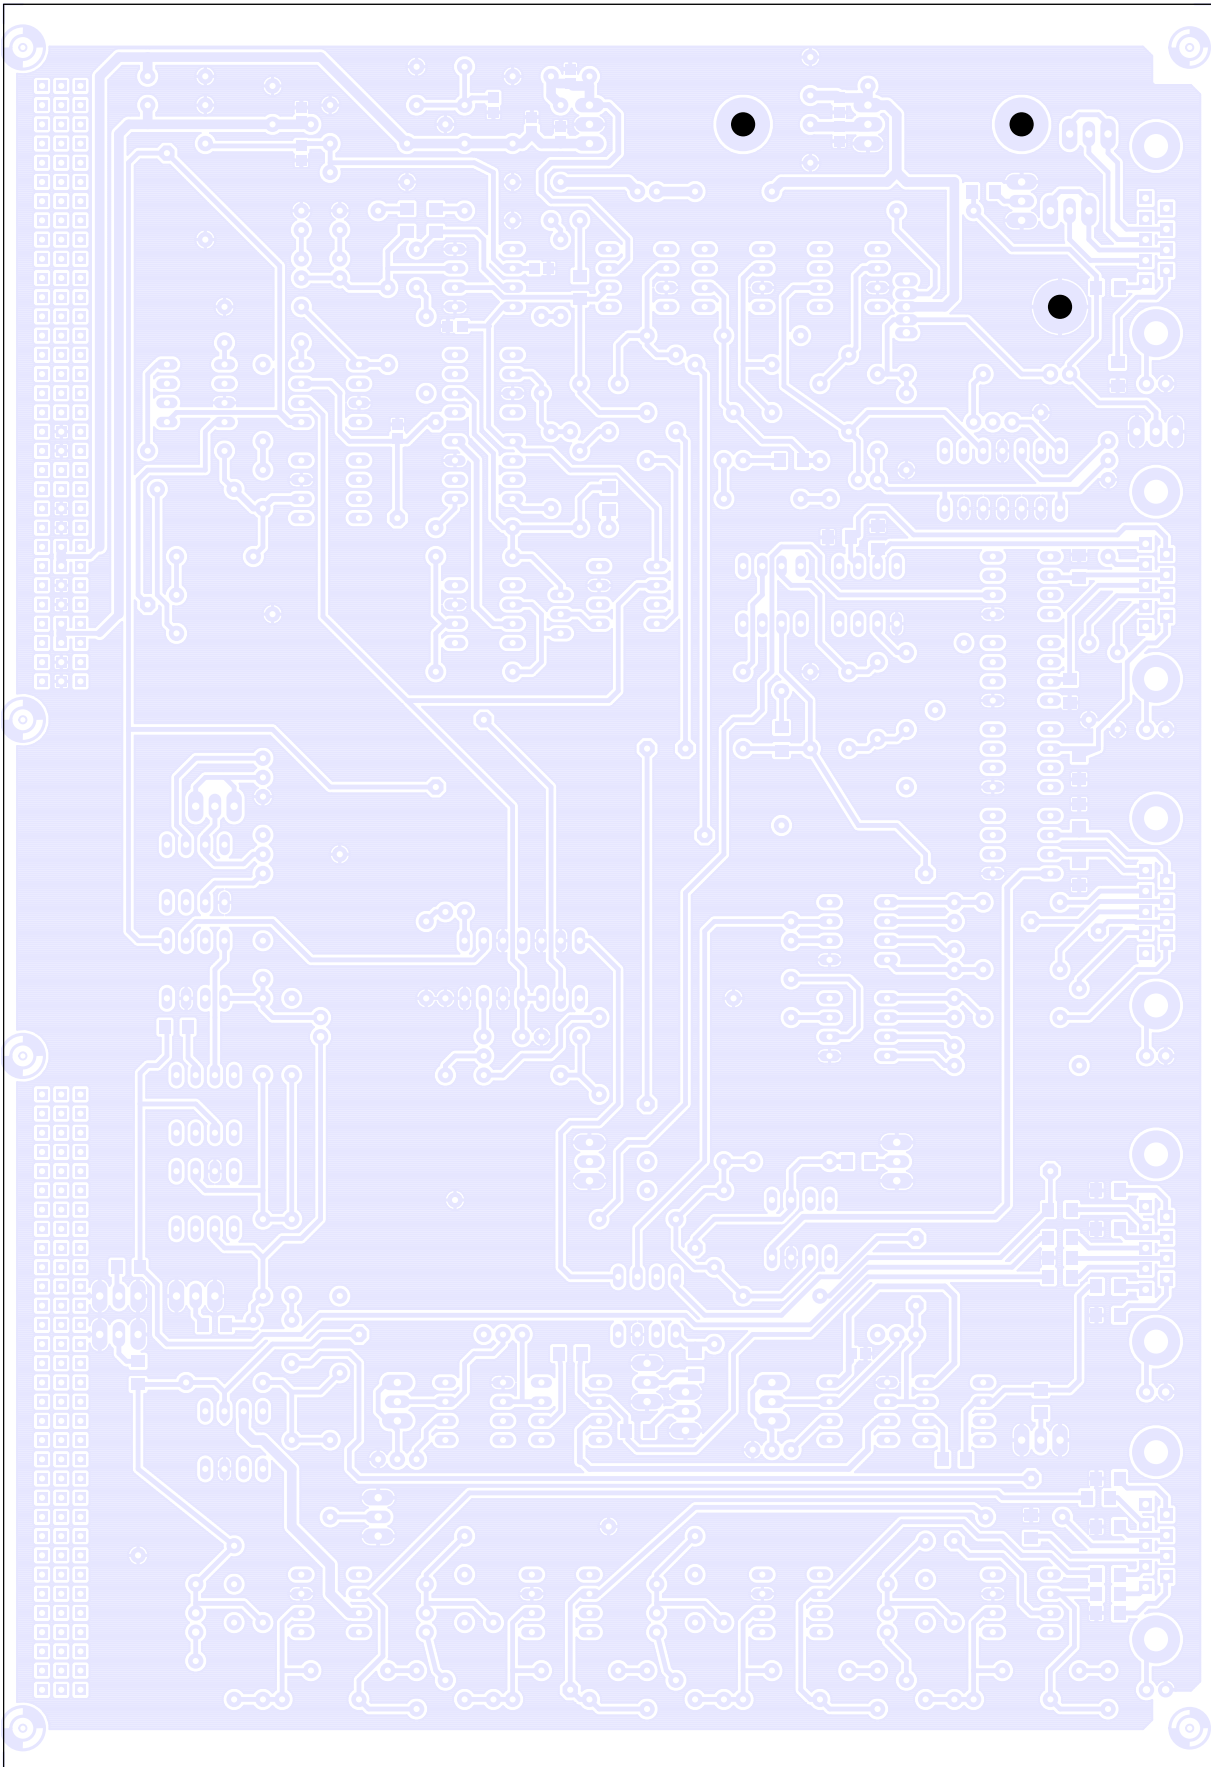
Board bottom view showing drills with 3.2 mm (0.126 in) diameter
